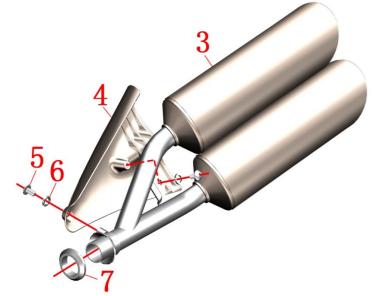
MUFFLER COMPONENT		Muffler rear assembly	CHK	Q
